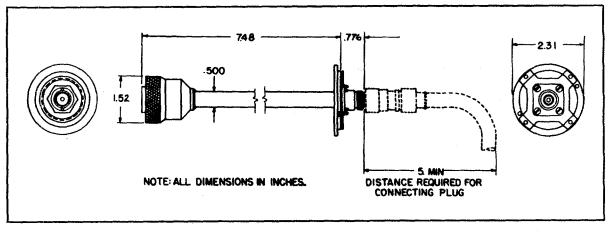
Antenna Coupler CU-174/APA-69, Outline and Mounting Dimensions
